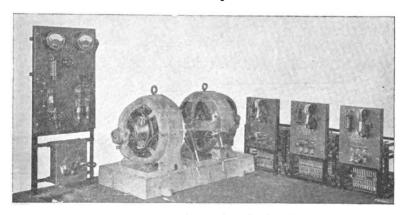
300-Ampere Welding Set with Control Panel and Auxiliary Welding Panels
